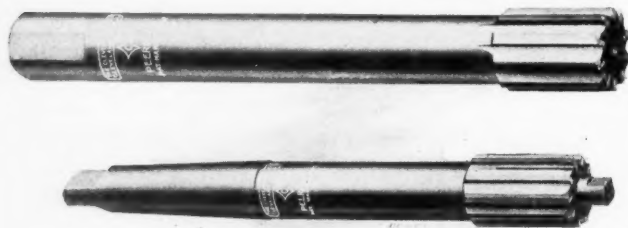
Solid Roughing Reamer with Brazed Blades of High-speed Steel.
